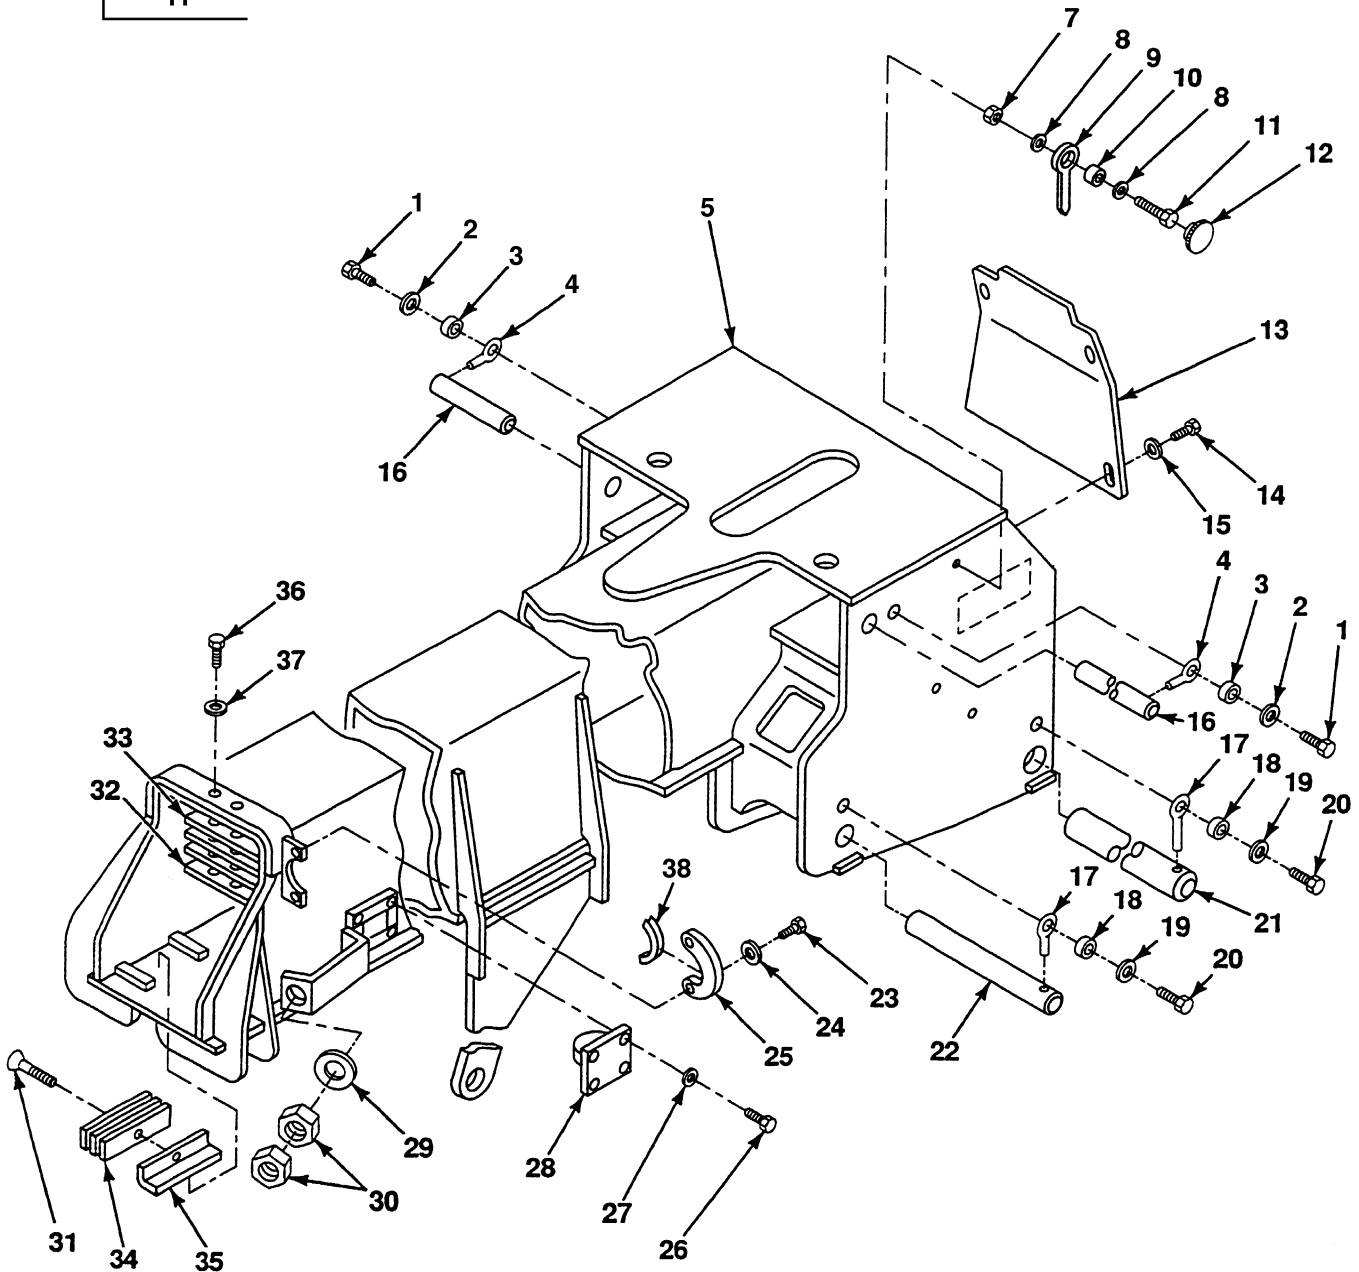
CRANE BOOM ASSEMBLY BASE SECTION
